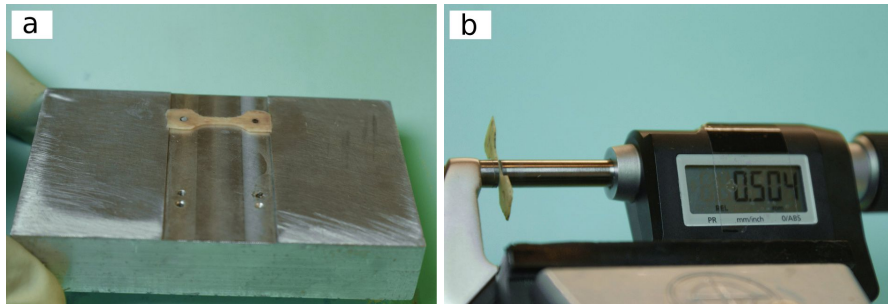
Coupon assembled on the polishing tool (a), and coupon thickness measurement (b).
